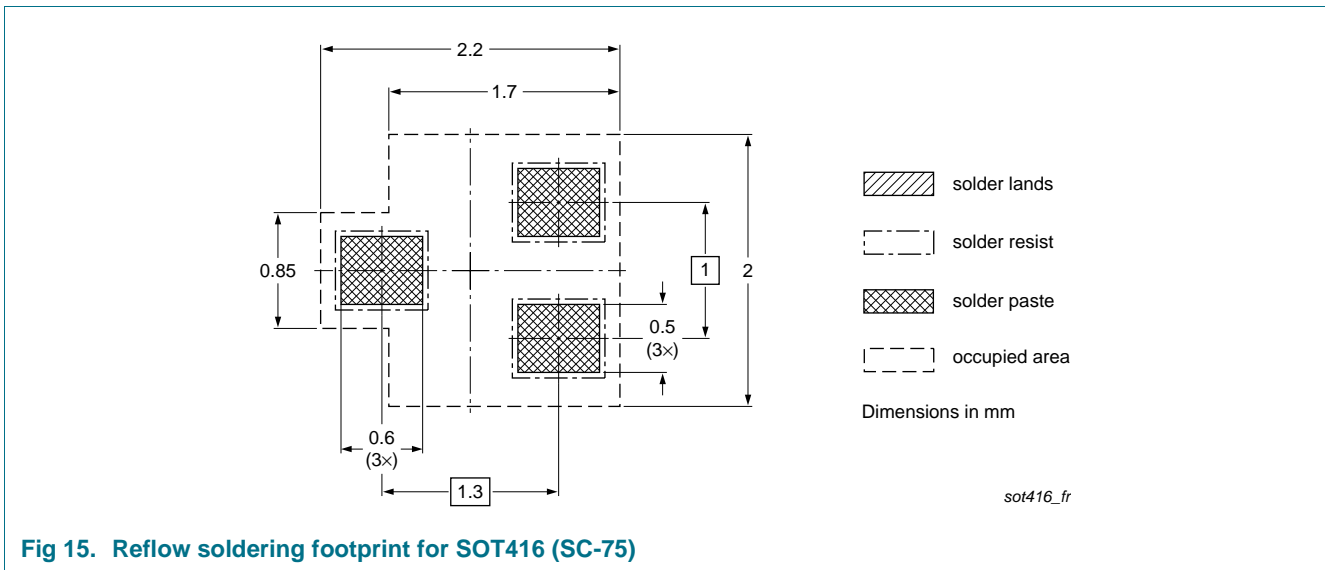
Reflow soldering footprint for SOT416 (SC-75)
